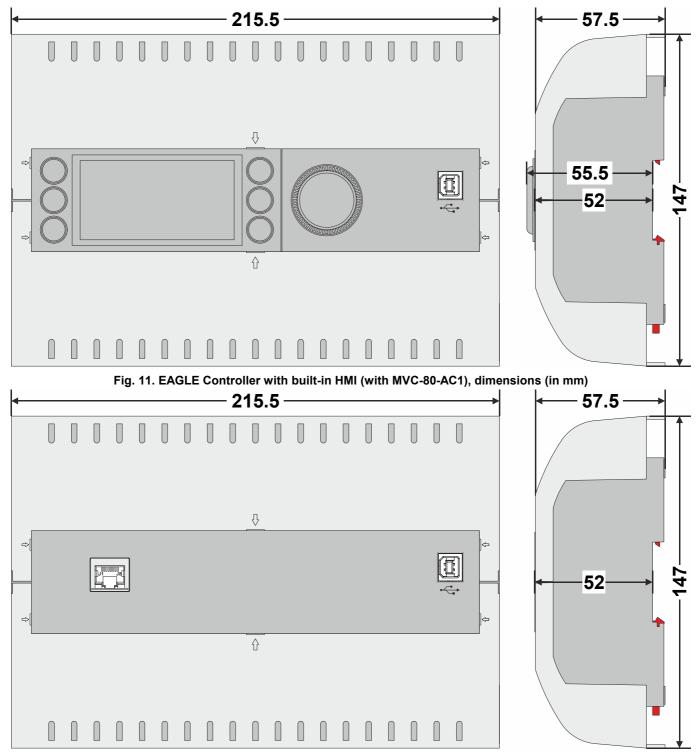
EAGLE Controller with RJ45 socket for CLEAHMI21 External HMI (with MVC-80-AC1), dimensions (in mm)
